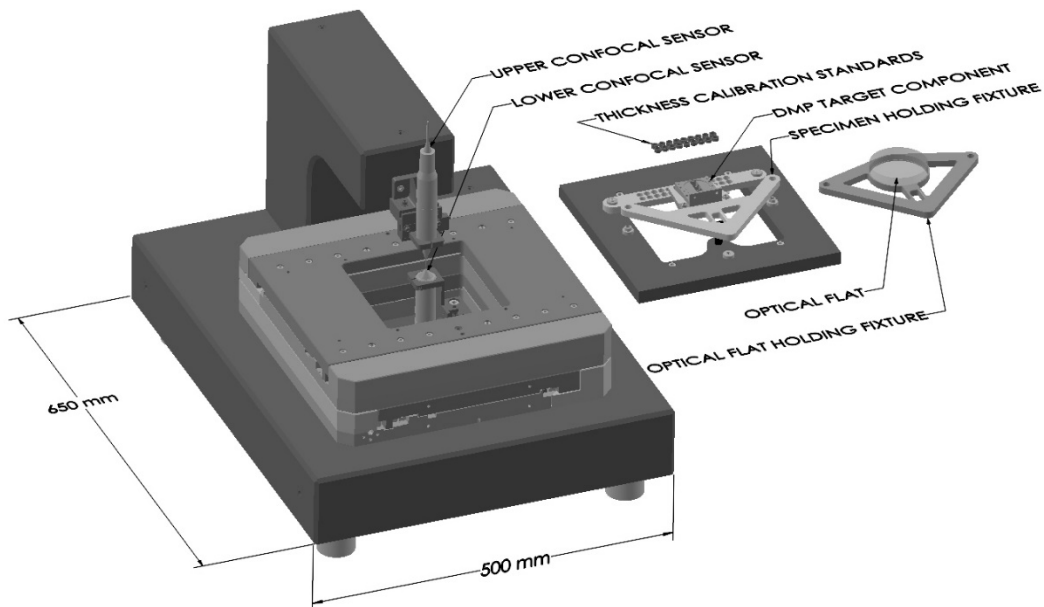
Enhanced Dual Confocal measurement system with enclosure removed and fixture elements shown to right for clarity.
